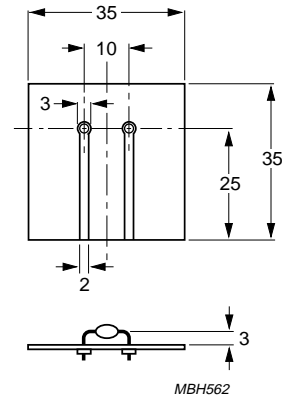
Leaded device mounted on printed-circuit board 35 × 35 mm.
